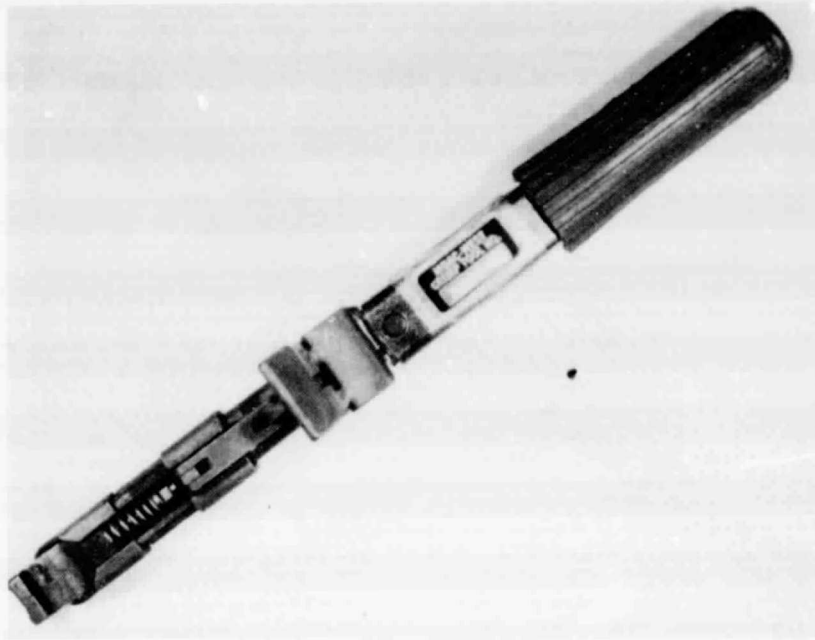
Frontal View of McDonnell-Douglas Tool with Gripper Jaw Open.
